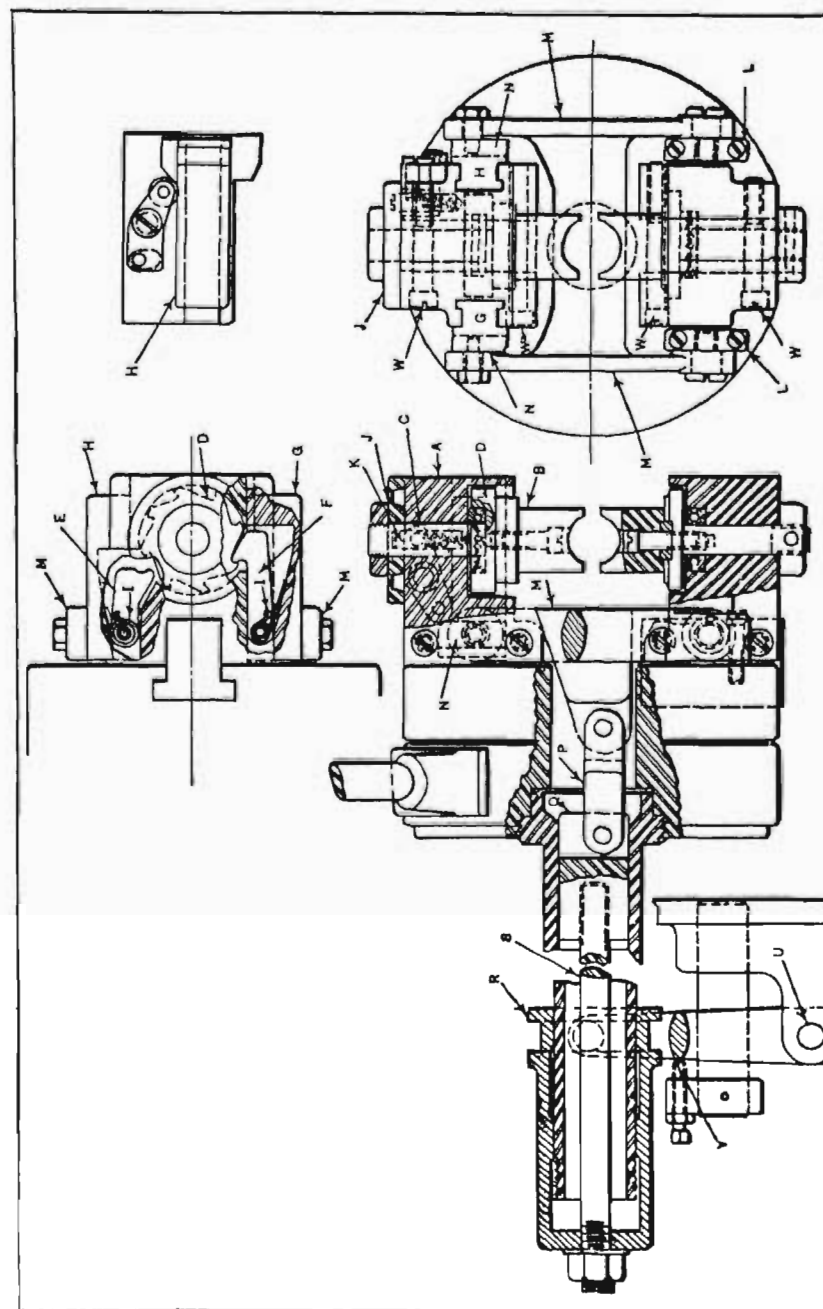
Turret Lathe Chuck which may be Indexed while Revolving
